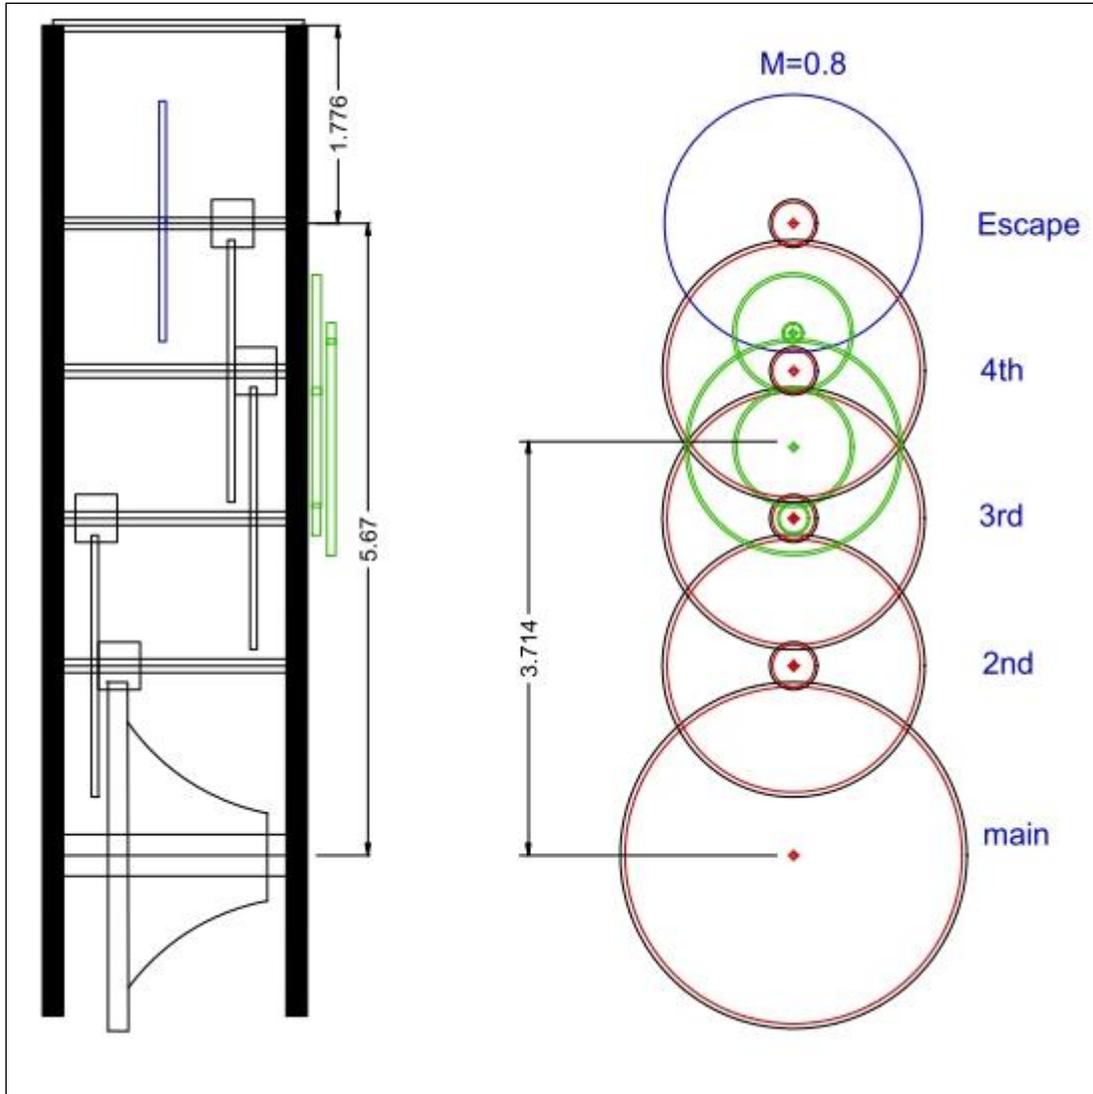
CAD sketch used to determine wheel spacing and placement. This drawing is used to look for interference between parts and to provide preliminary dimensions. The circles on the right represent the wheels with black circles for the tips of the teeth, red circles for pitch diameter and green for the motion works. Black circles overlap (representing teeth meshing) and red circles touch at a single point.
